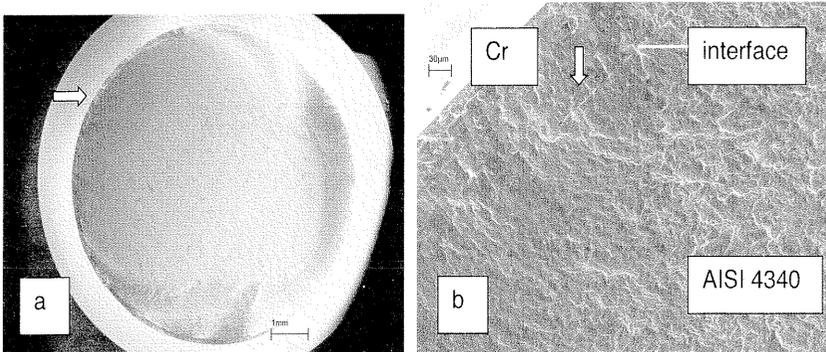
a) An overview of the fatigue fracture surface: base material with chromium plating (53HRC); b) Detail of crack source.
